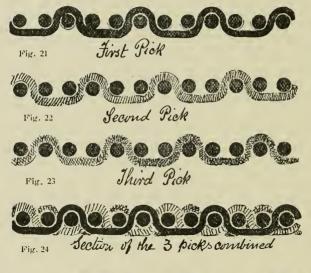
is a cut section of the first pick of weave in Fig. 15.
